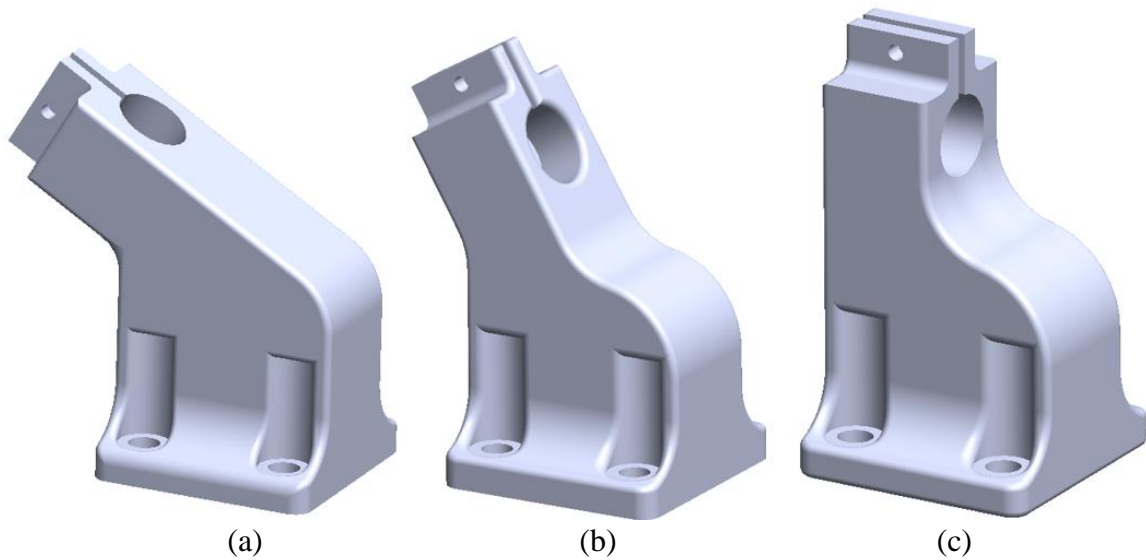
SolidWorks model of (a) 30 degree fixture, (b) 60 degree fixture, (c) 90 degree fixture
